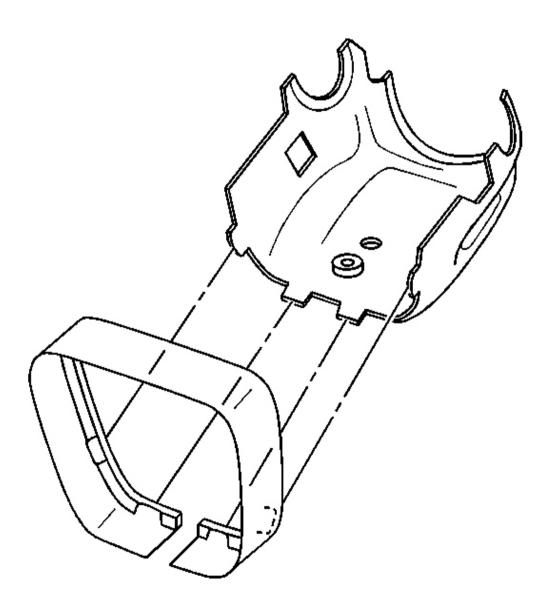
Lower Trim Cover Tabs & Steering Column Close Out Trim Cover Courtesy of GENERAL MOTORS CORP.
